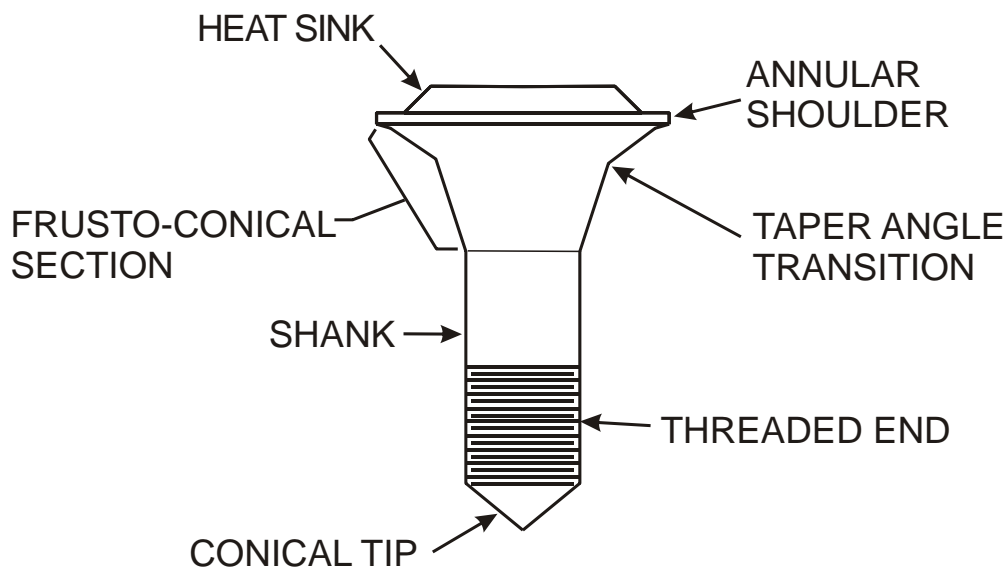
Depiction of tapered plug used or plug welding (Metz, Weishaupt, Barkey, & Fairbee, 2011).
